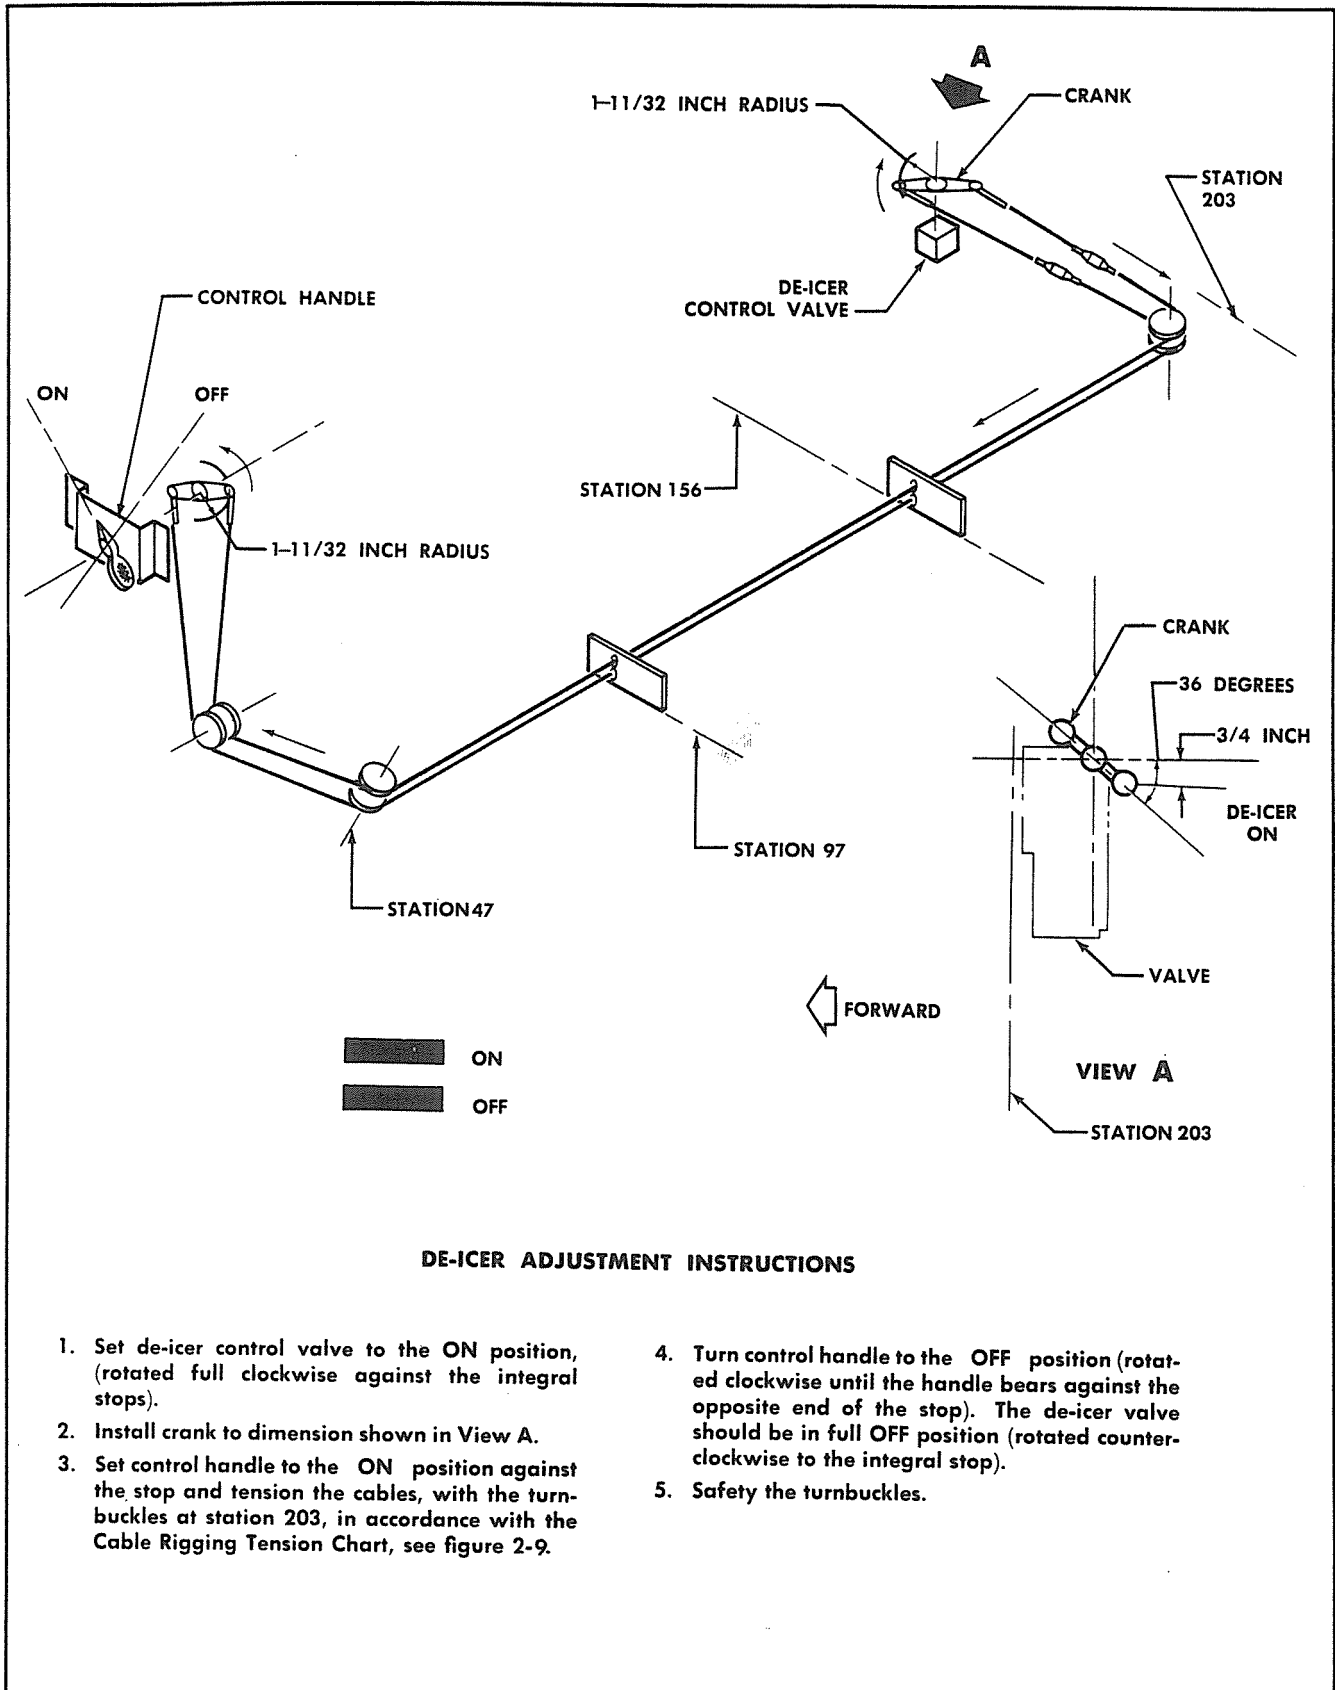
(Sheet 3 of 4 Sheets). Surface De-Icing Control System — Adjustment Diagram
